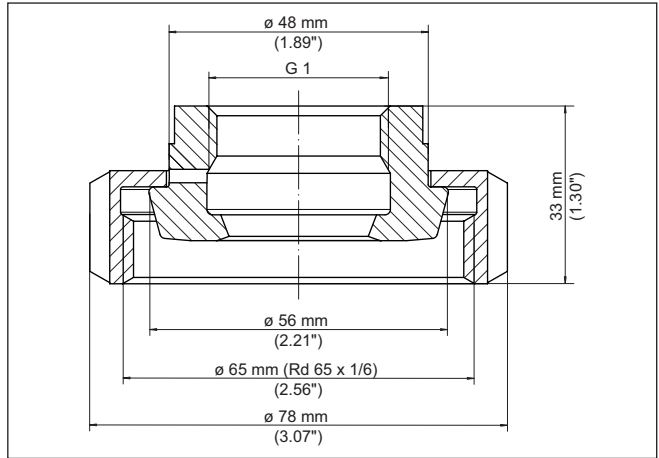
Dimensions hygienic adapter G1 (DIN 3852-X) on slotted nut DN 40 (DIN 11851) PN 40 - Cone seal
